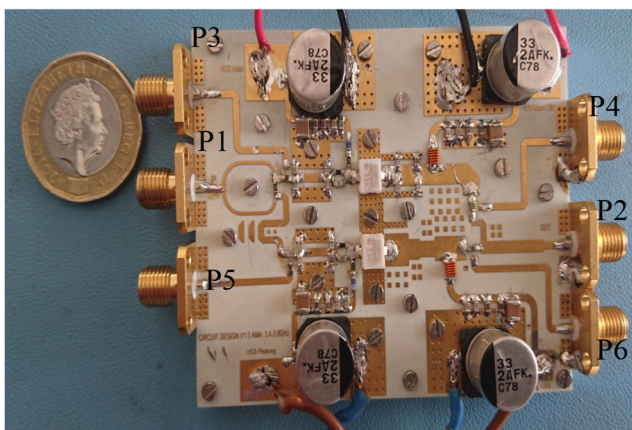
Fabricated prototype of load-modulation technique without a quarter wavelength
